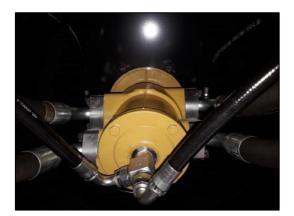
Hydraulic hose connection from the slewing frame to the center joint
